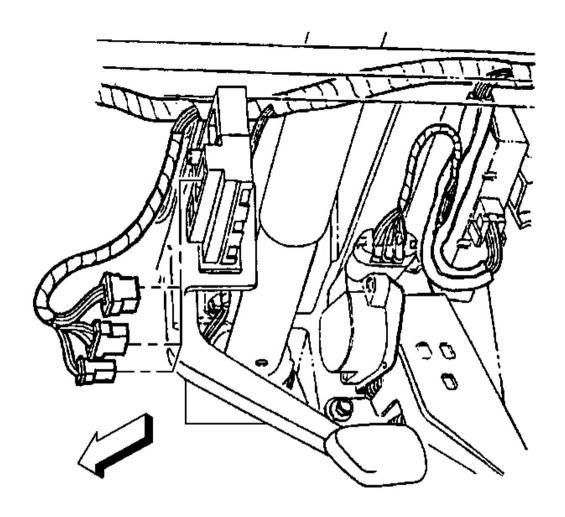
Lower Trim Panel & Stop Lamp Switch Connectors Courtesy of GENERAL MOTORS CORP.
